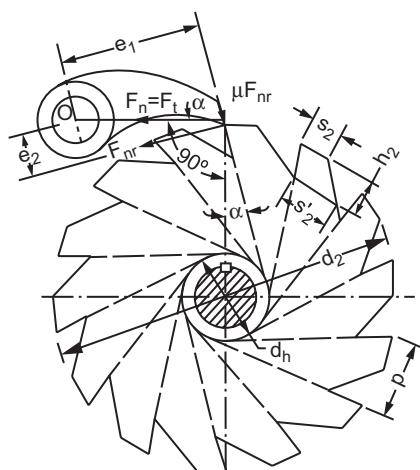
Ratchet wheel with non-radial tooth flanks and pawl.
